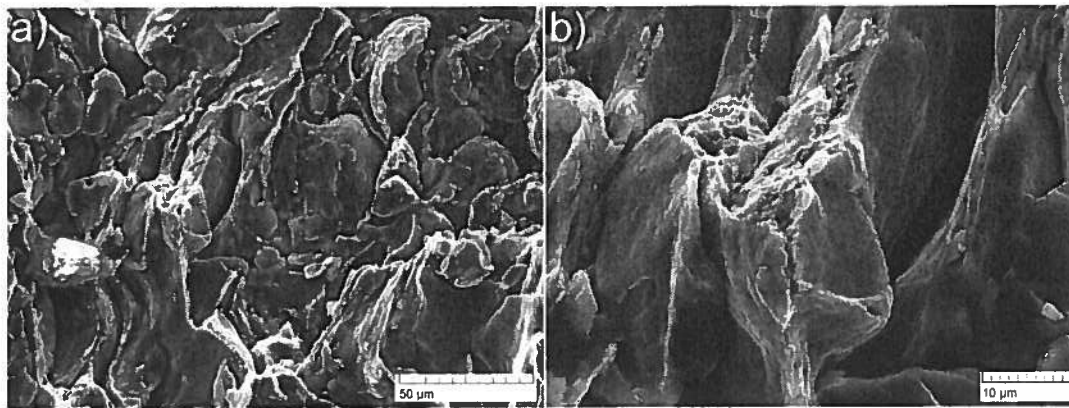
(a) interparticle brittle fractures and (b) dimpled appearance of ductile particle fracture.
